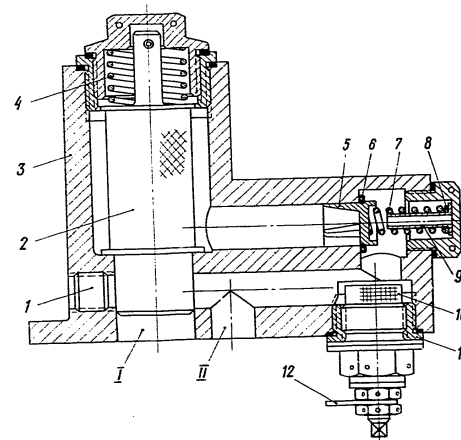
CONSTRUCTION OF CHIP-DETECTING FILTER $\Phi C-23$
